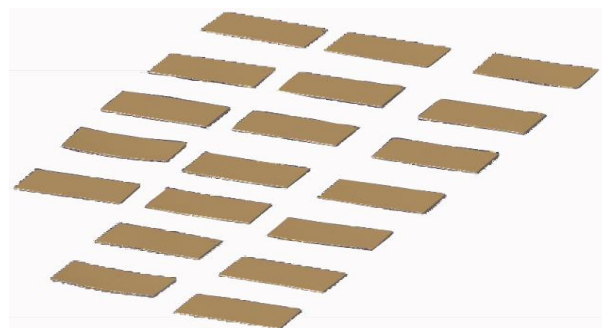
Exported CAD file showing the 3D scanning of some specimens.
